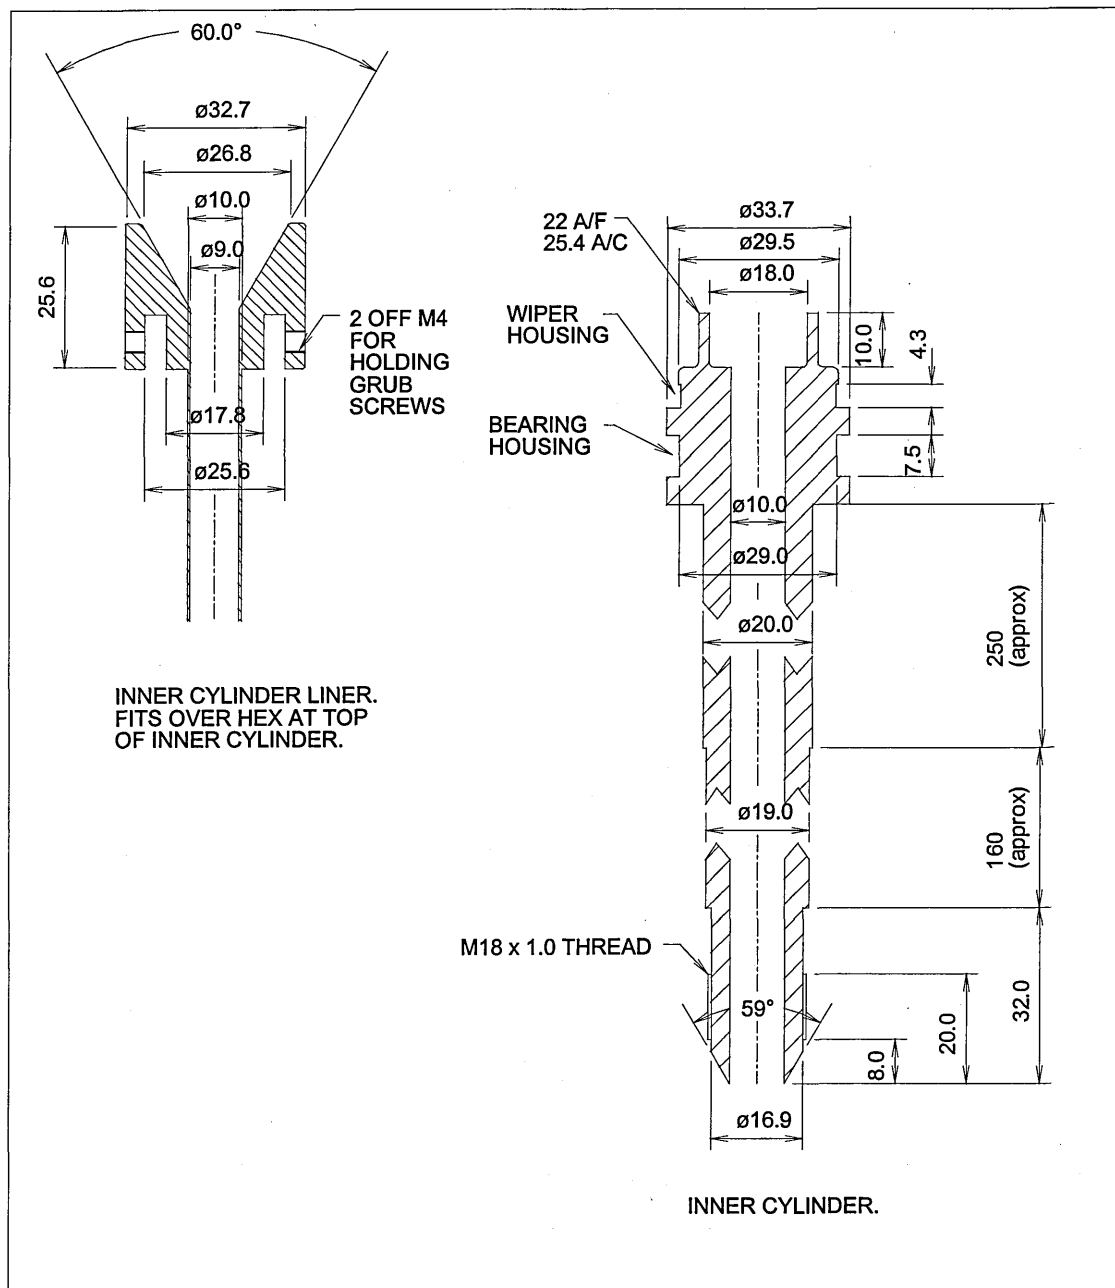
INNER CYLINDER AND LINER DESIGN
